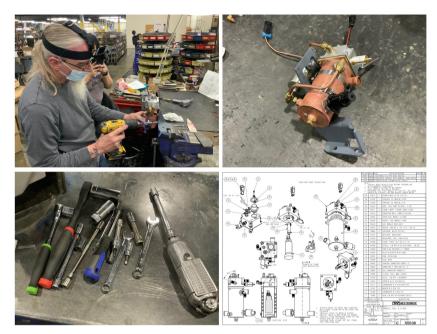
Top left*: An expert worker performing the fuel cell assembly task. *Top right*: The fuel cell assembly module. *Bottom left*: Hand and power tools used for assembly. *Bottom right*: Technical drawing and bill of materials.
